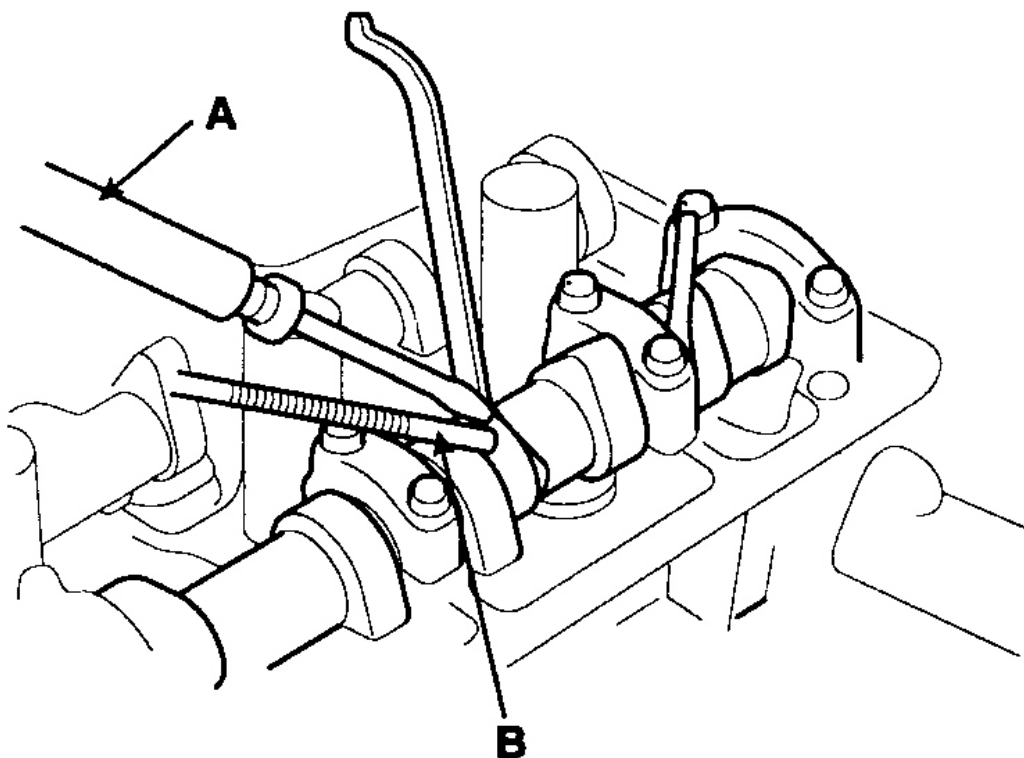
Adjusting Intake And Exhaust Valve Clearance
